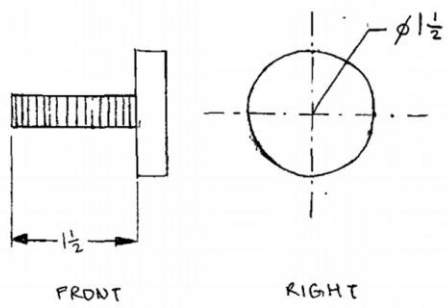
Dimensioned orthographic views of the thumb screw/knob
